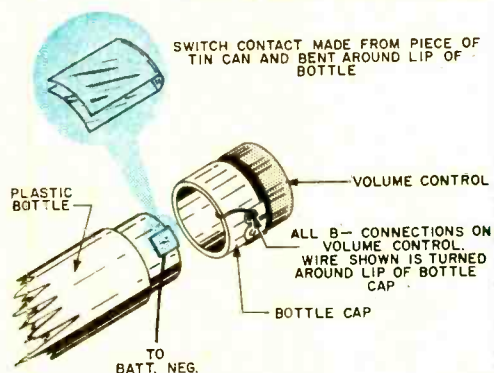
Details of mechanical assembly of pill-bottle probe shell.
